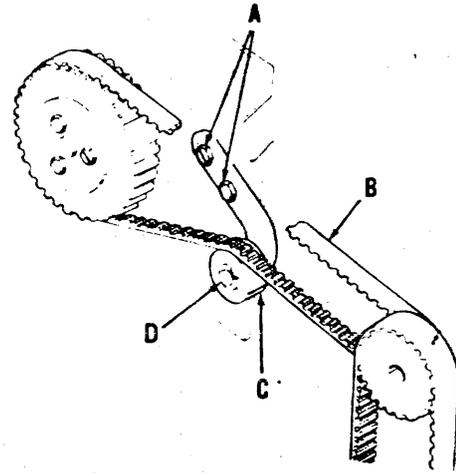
60 CPS CARRIAGE DRIVE BELT TENSION ADJUSTMENT
